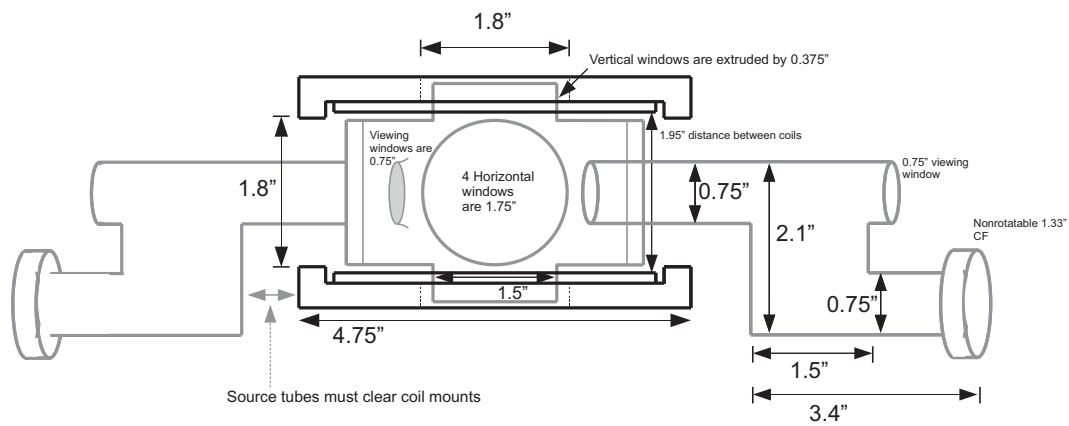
Technical drawing of the ^{40}K MOT Cell as sent to the glassmaker.
